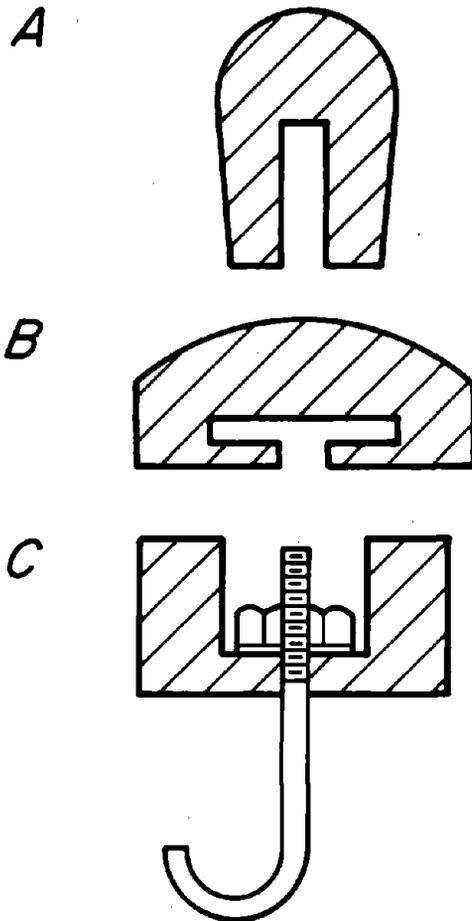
• Cross section of typical resilient protection for sizing screens. A, Molding (bumper strip) for support members; B, molding for a center bar clamp; C, block or ring for a J-hook clamp.
